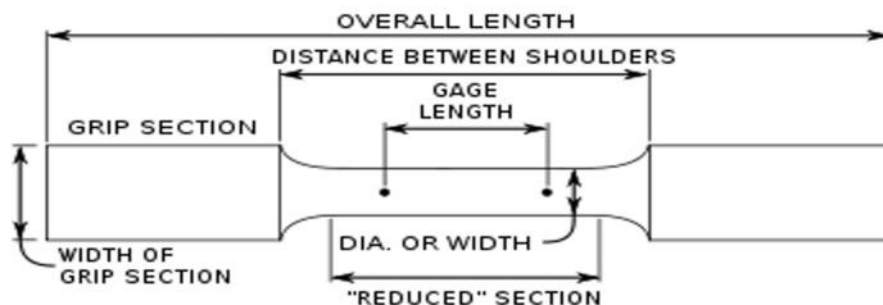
Schematic diagram of tensile specimen according to ASTM E8 obtained by machining
